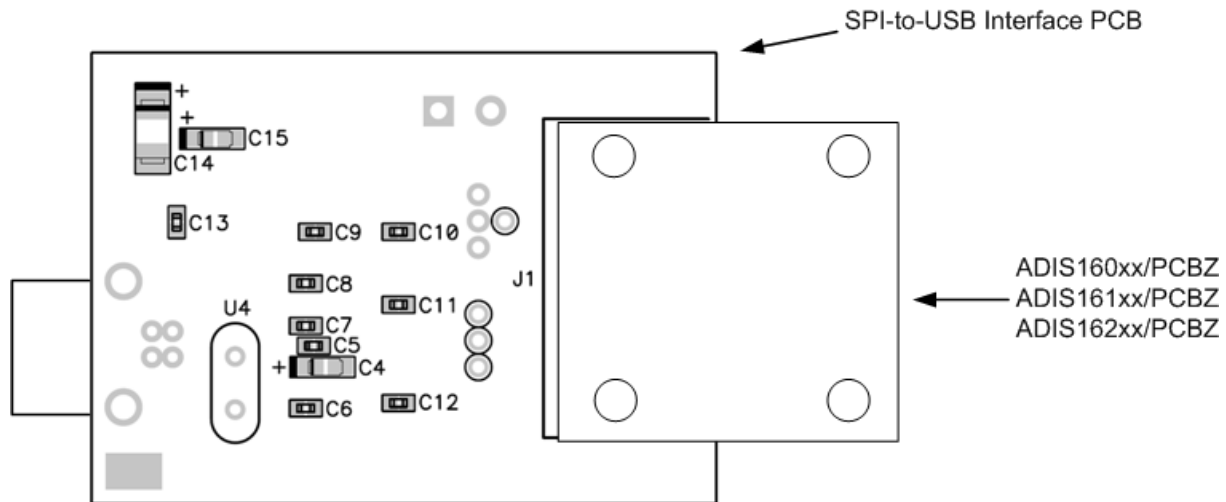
USB Interface PCB connection with ADIS160xx/PCBZ, ADIS161xx/PCBZ, ADIS162xx/PCBZ, Bottom View
